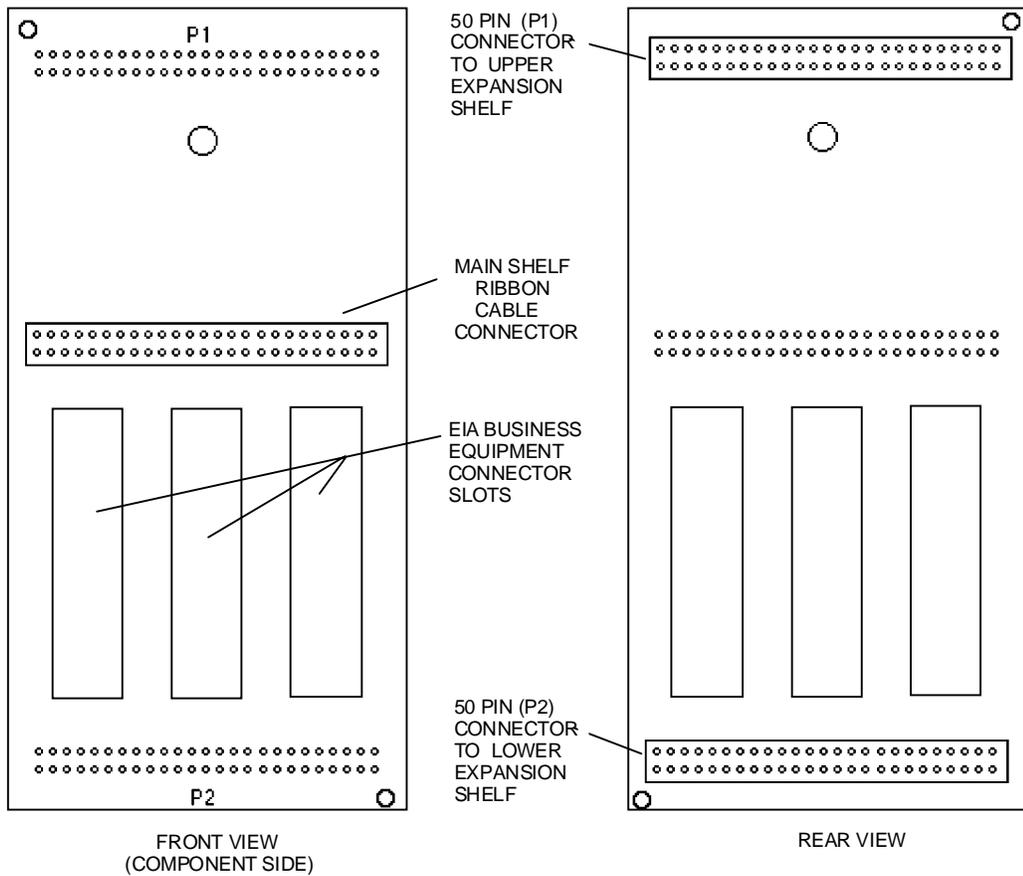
Flex Card Front and Rear View (036P091-001)
